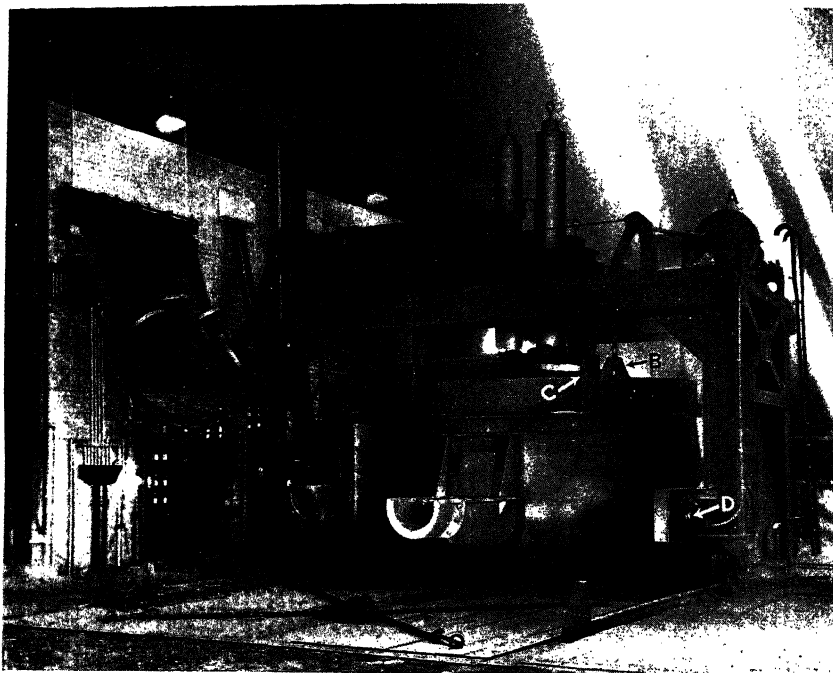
Gantry-type removable roof furnace. A, roof lift; B, suspension of roof; C, pins for stiffening roof in lifted position; D, gantry travel. (Courtesy *American Bridge Co.*, Pittsburgh, Pa.)
